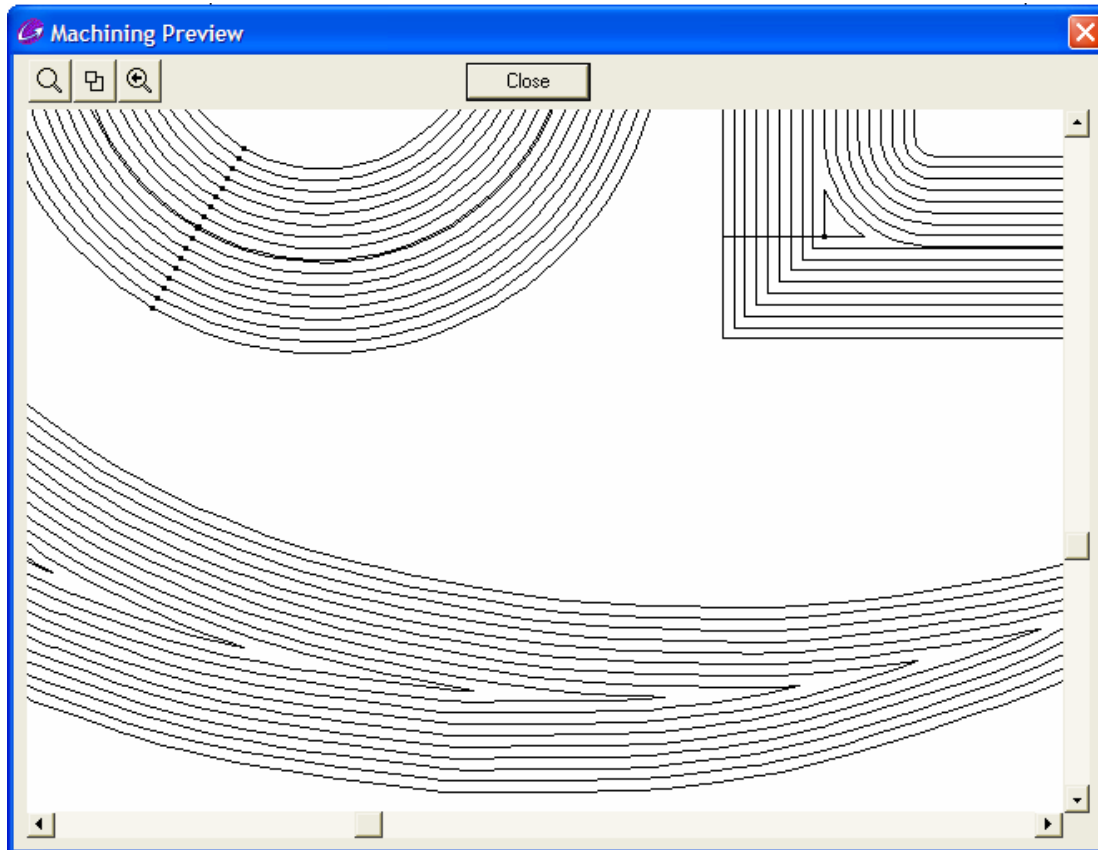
Enlarged View Showing Cutting Tool Paths
